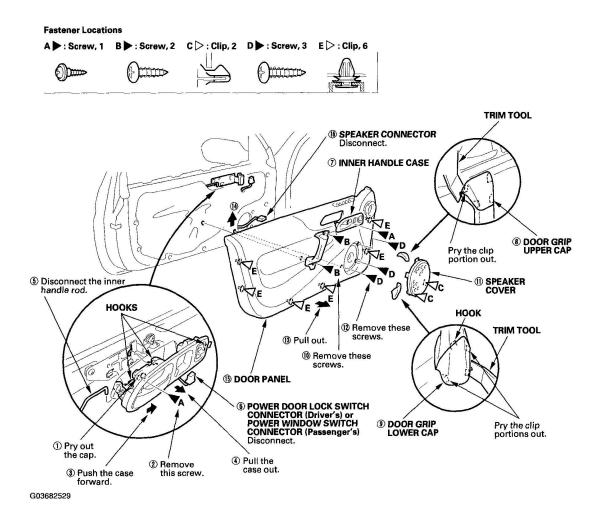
Identifying Removal Sequence Of Door Panel Courtesy of AMERICAN HONDA MOTOR CO., INC.
